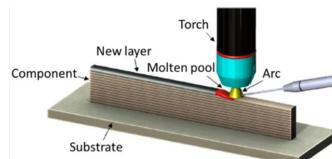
Robotic Wire Arc Additive Manufacturing (WAAM) (Rodrigues et al., 2019)
